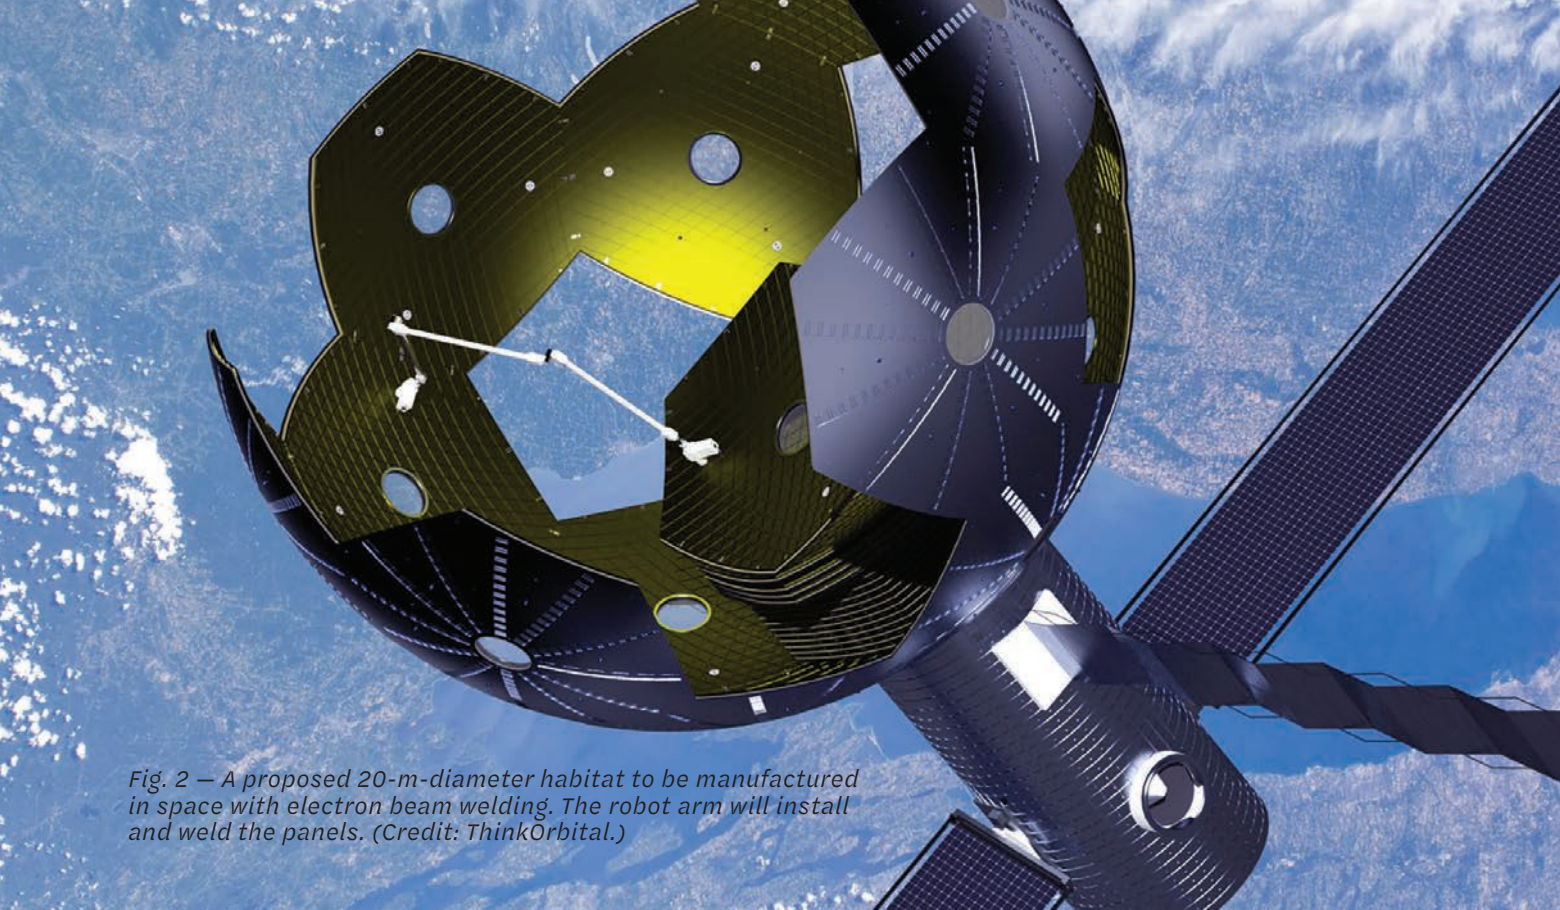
A proposed 20-m-diameter habitat to be manufactured in space with electron beam welding. The robot arm will install and weld the panels. (Credit: ThinkOrbital.)
